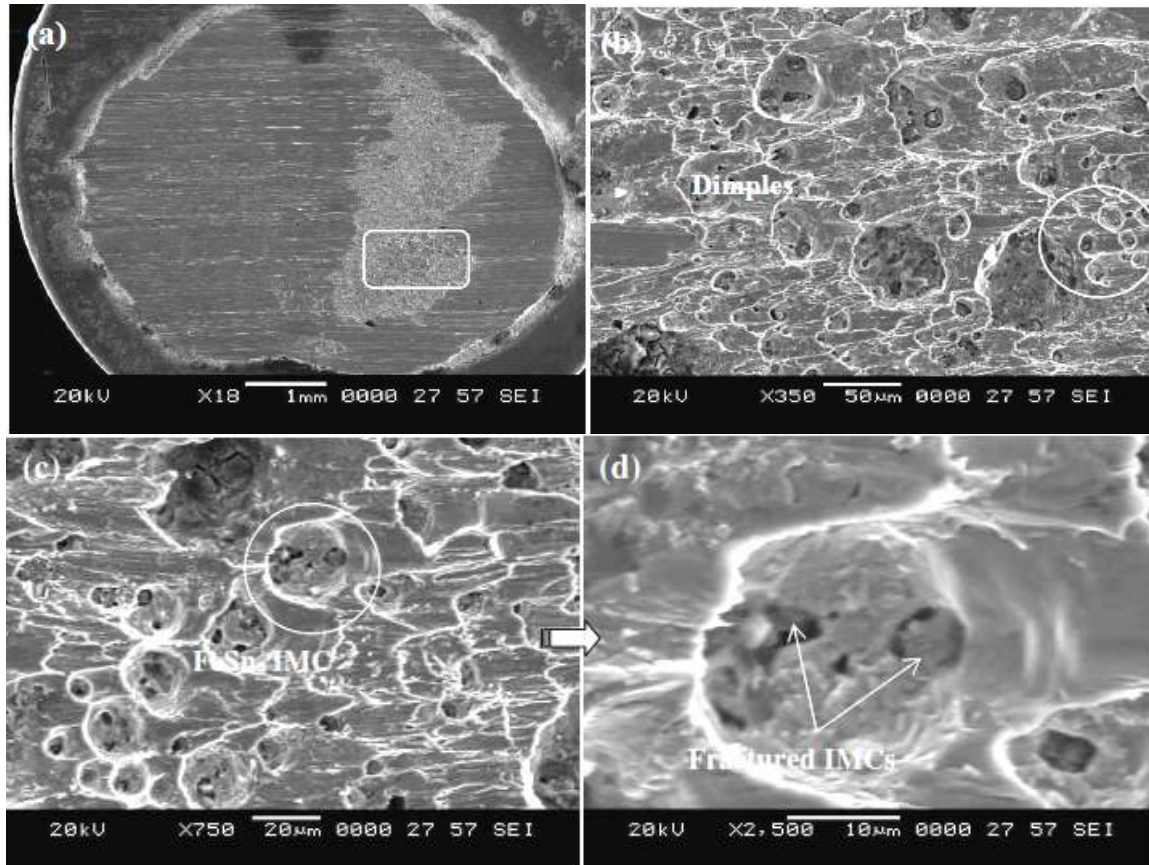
SEM micrographs of the fractured surfaces of Sn-2.5Ag-0.5Cu solder on mirror Fe-Ni substrate surface (a), (b) lower magnification (c), (d) higher magnification
